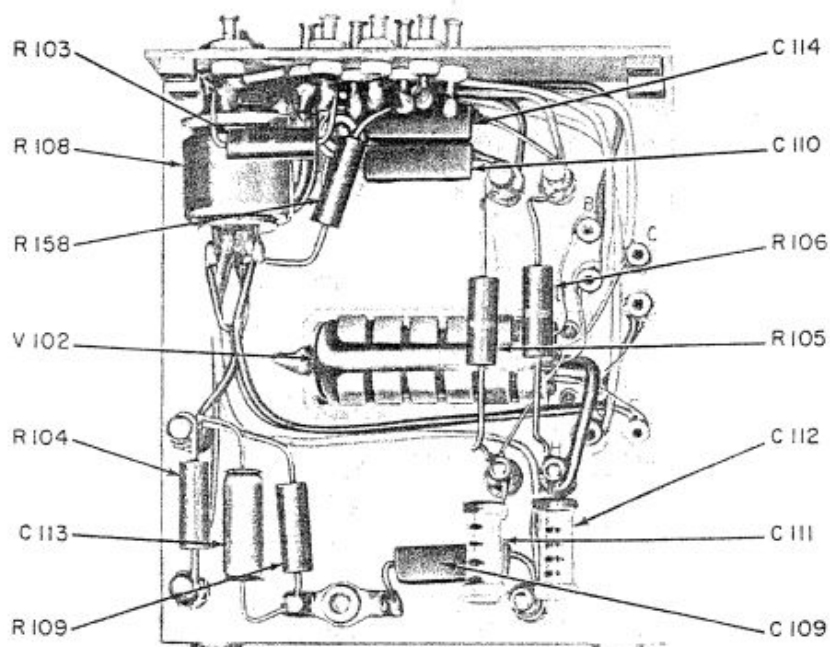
ARC Type R-30A Receiver, Modulator Assembly Z102
